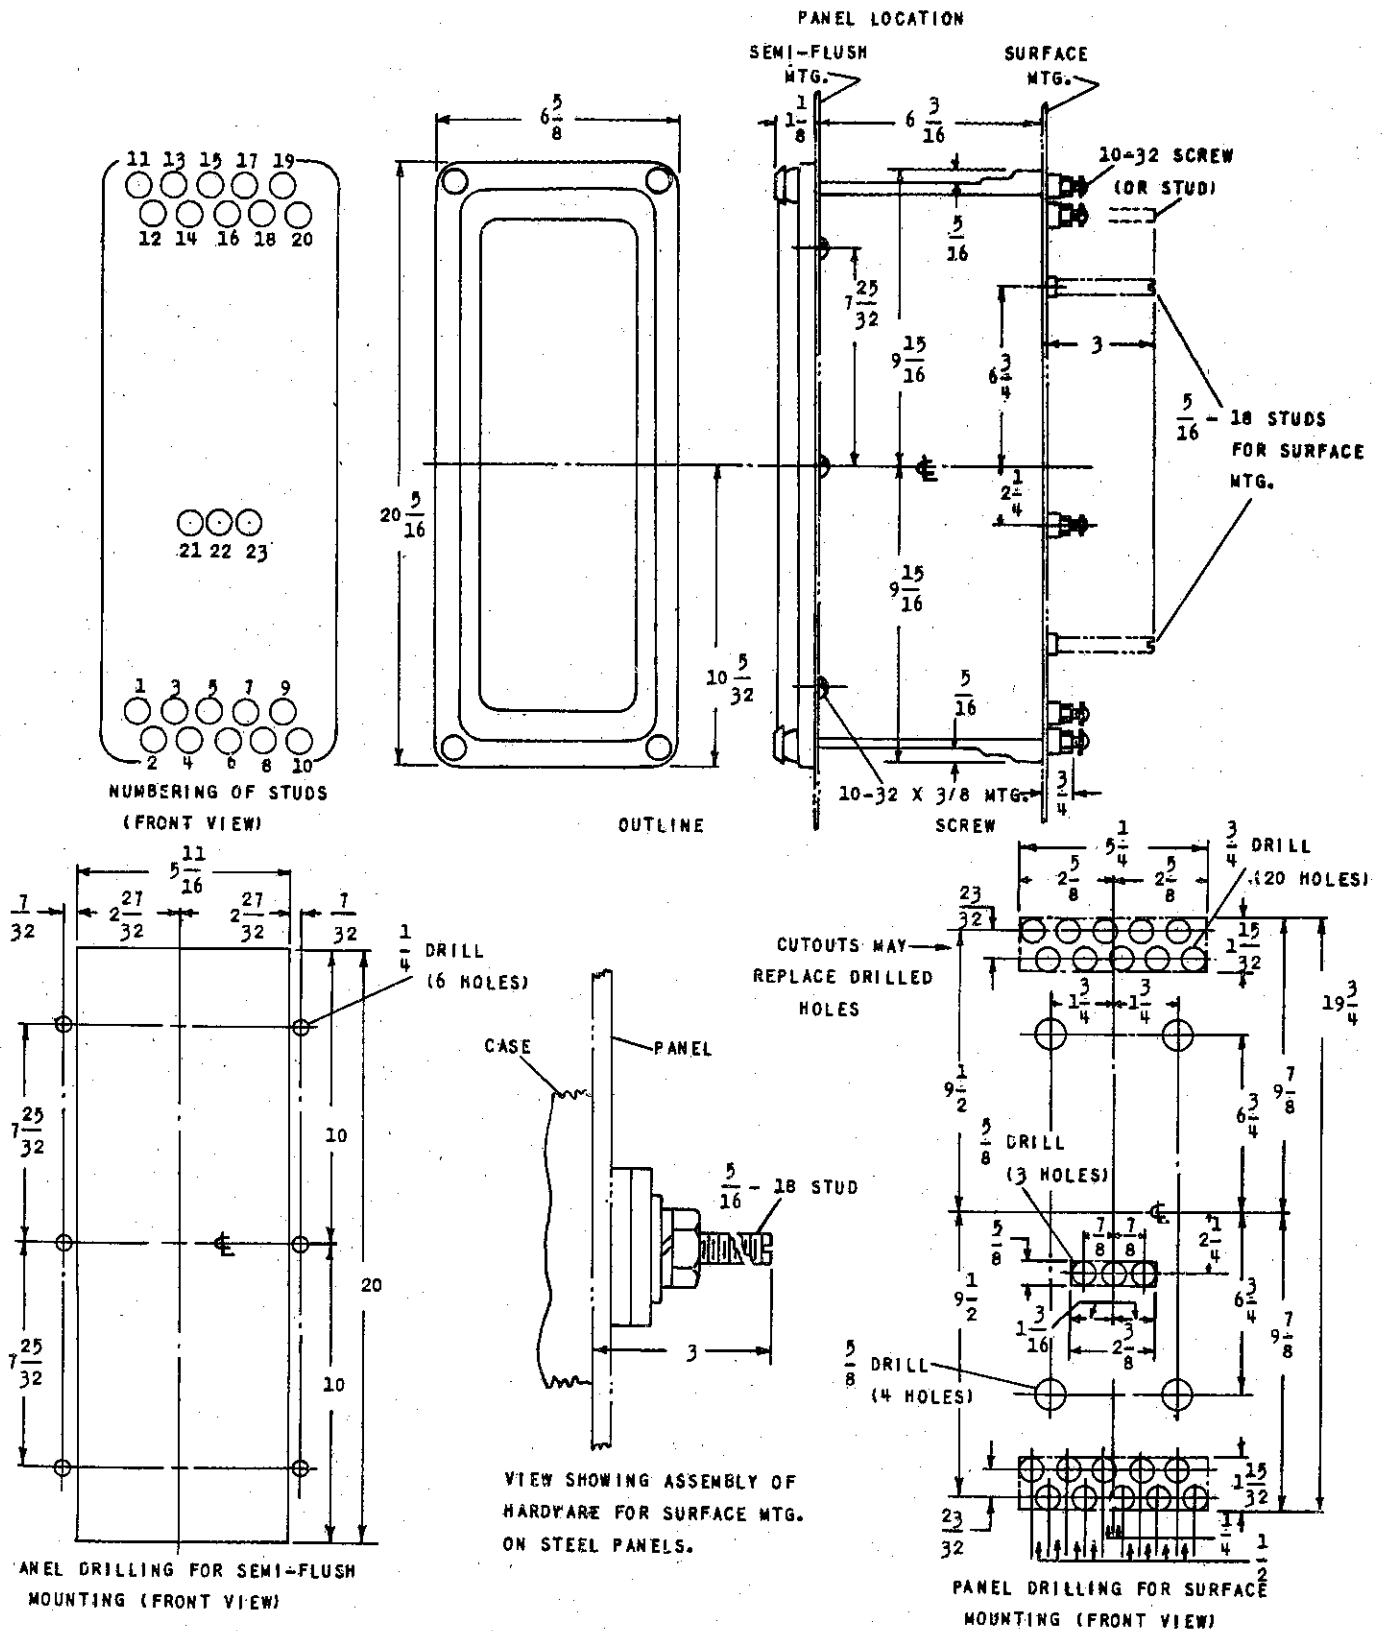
Outline & Panel Drilling Dimensions For Type EDD Relay (Tripping Unit)
